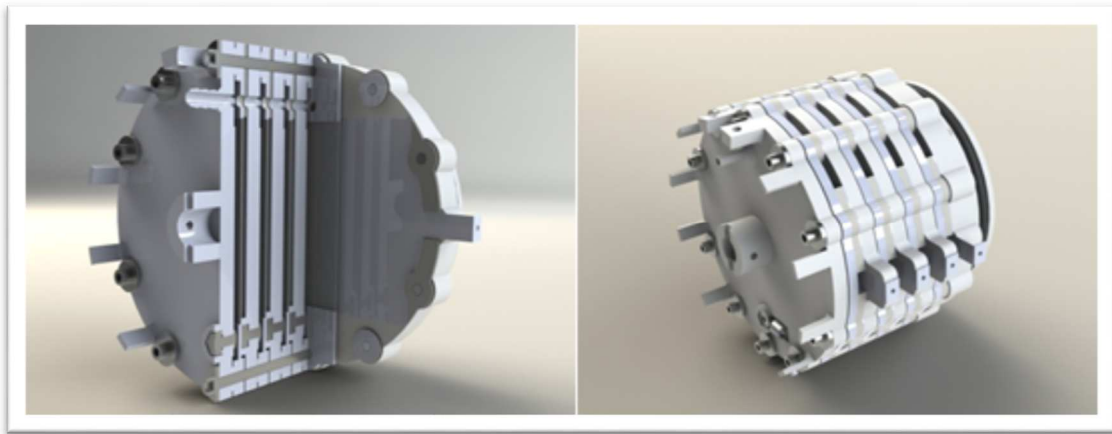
Construction of EOT; cutaway to highlight parallel pumping chambers (left), exterior showing inlet connections and bubble exhaust ports on top (right)
